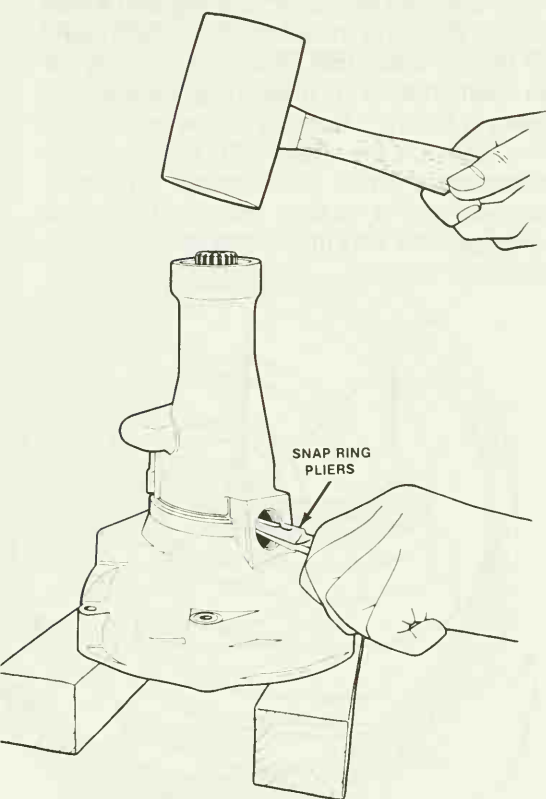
The mainshaft is removed by tapping with a rubber or plastic mallet. (American Motors Corporation)
